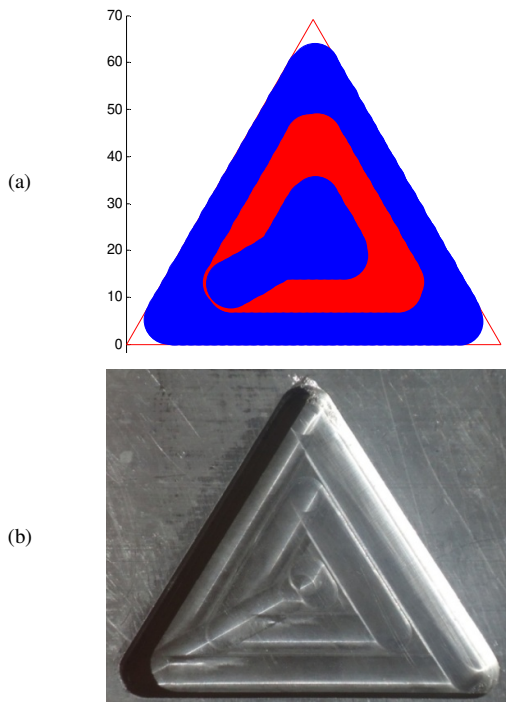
CPO tool paths: (a) machining simulation, (b) real machining.
